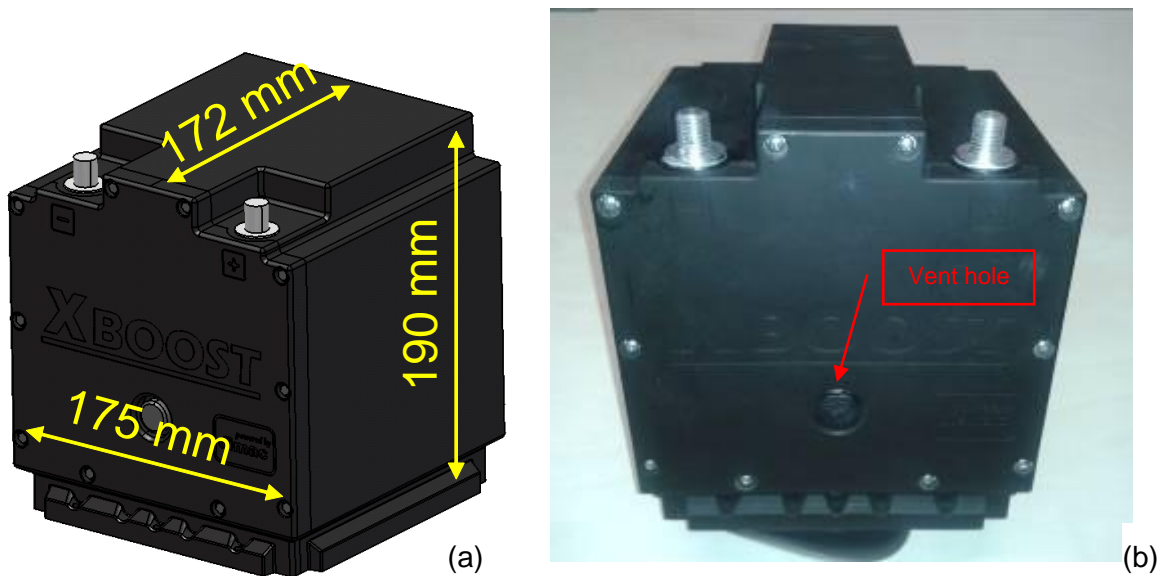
Mechanical drawing module layout (a) Drawing, (b) Real sample.
